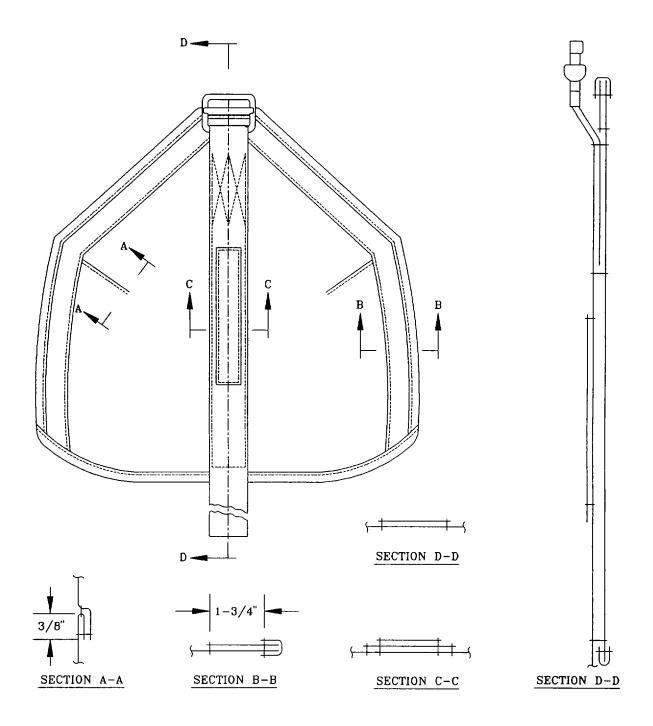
(Container Side Mounted) Lower Cap Assembly (Sheet 2 of 2)
